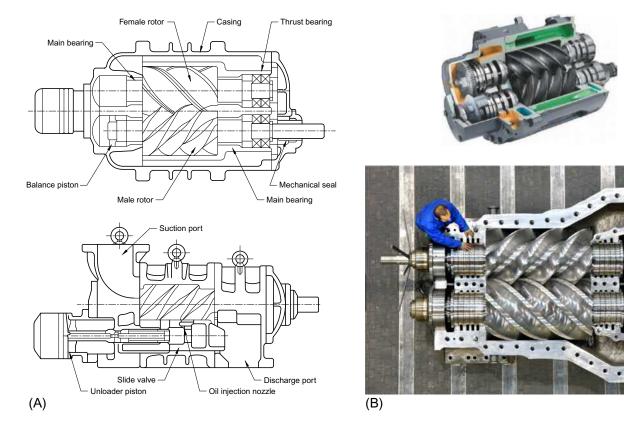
(A) Schematic of a rotary screw (helical lobe) compressor. (B) Sectional views of a rotary screw (helical lobe) compressors.
